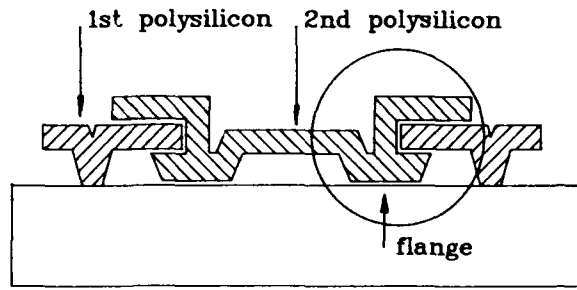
Cross section of the flanged plate slider. The plate can move freely in and out of the paper.
